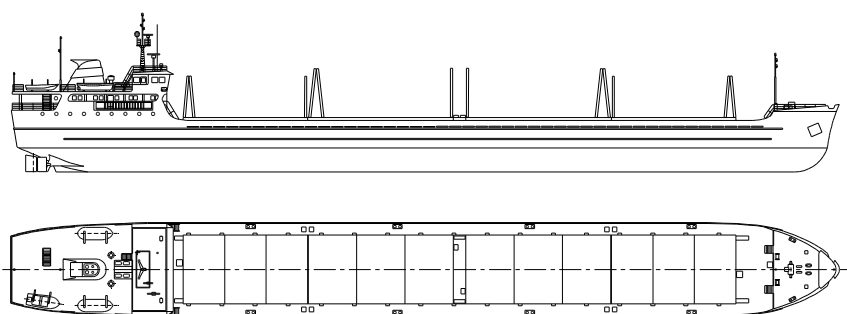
A general side elevation and deck layout of 'Sormovskiy' class
